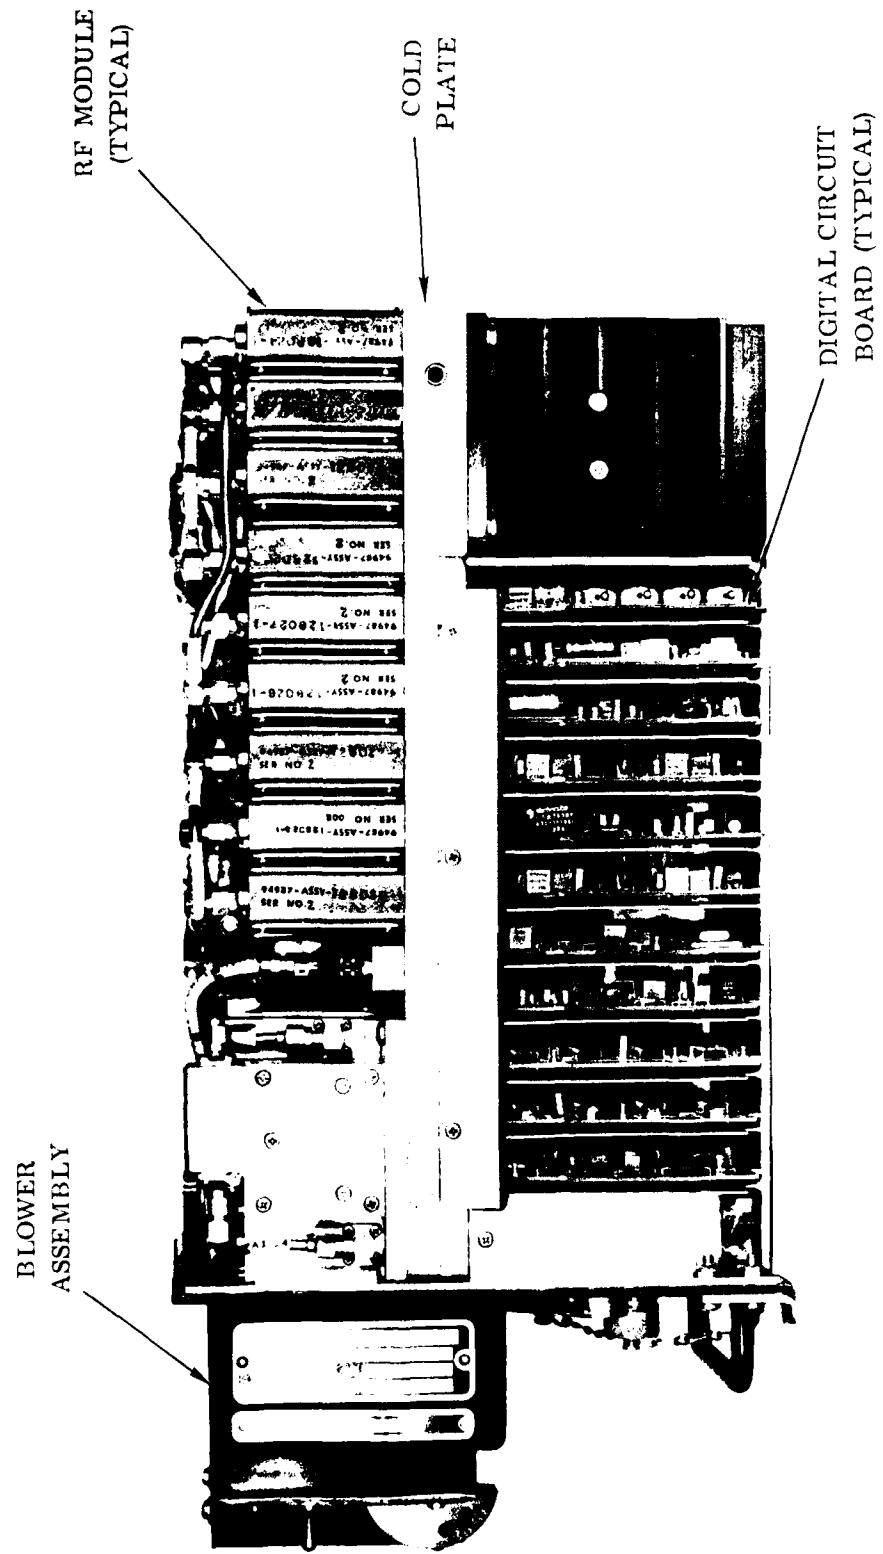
Side View of Airborne Interrogator (Housing Removed)
